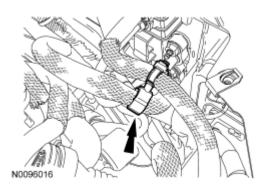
Identifying Coolant Vent Hose Retaining Clip Of A/C Tube Courtesy of FORD MOTOR CO.
